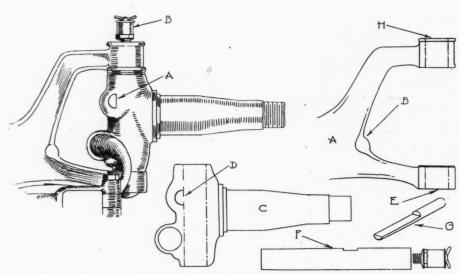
Layout of king bolt and steering spindle on 1915 Hudson
